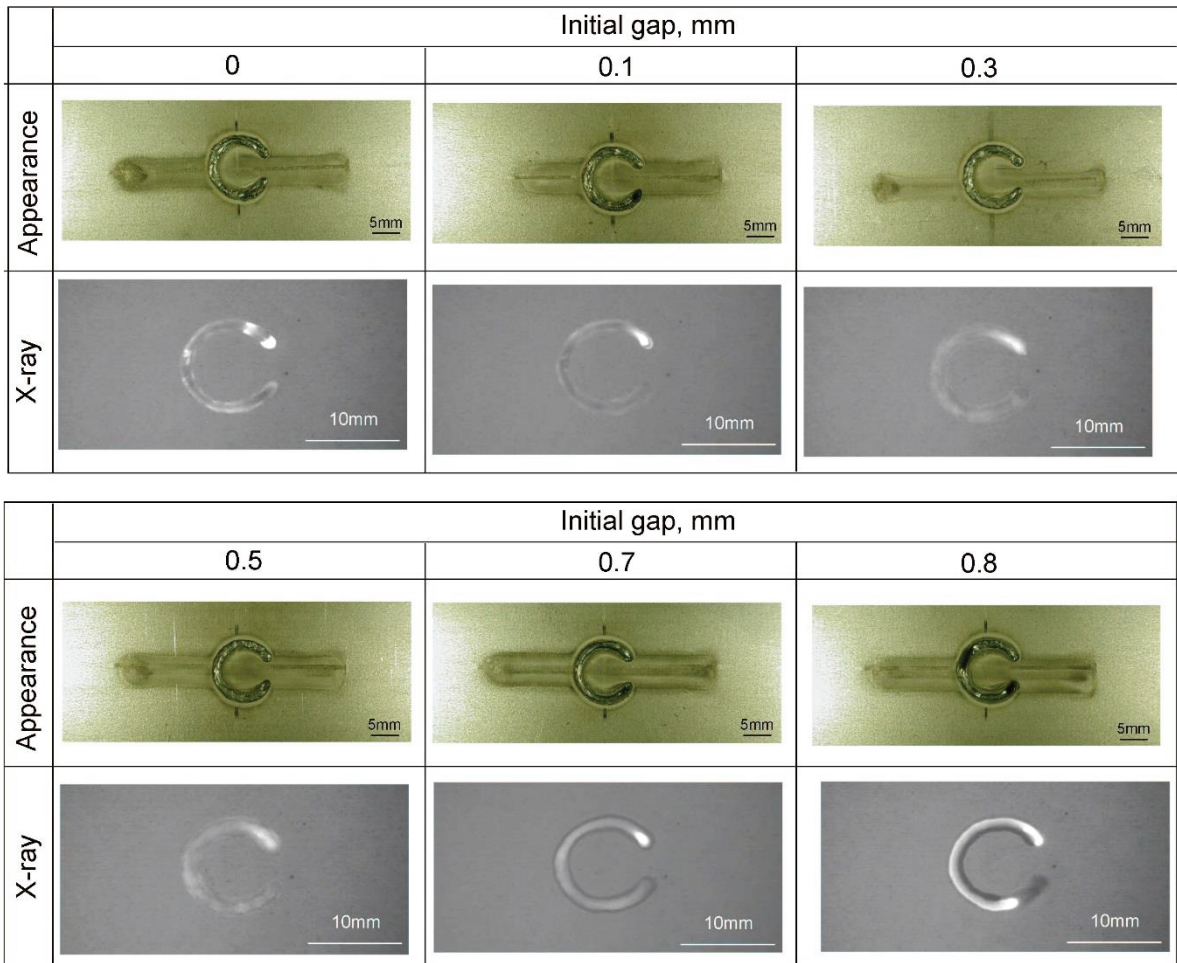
Bead appearances and X-ray photos of weld beads by laser preheating (1Pass-40mm bead).
